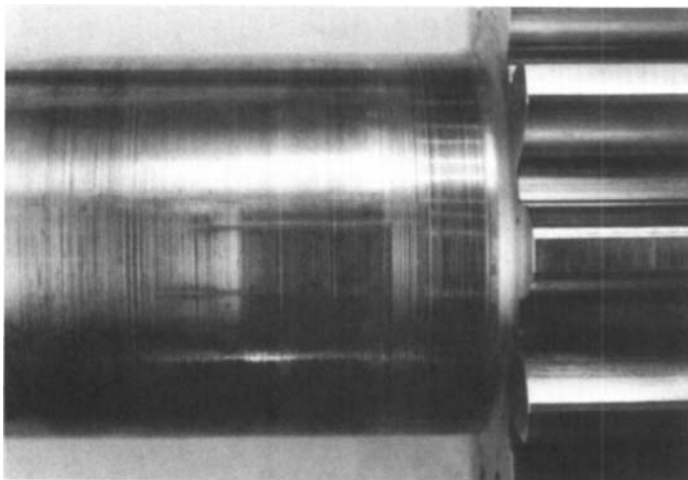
Gear shaft with subsequent cracking due to heat from adhesive wear process. (Courtesy of Kayaba Industry Co., Tokyo, Japan.)
